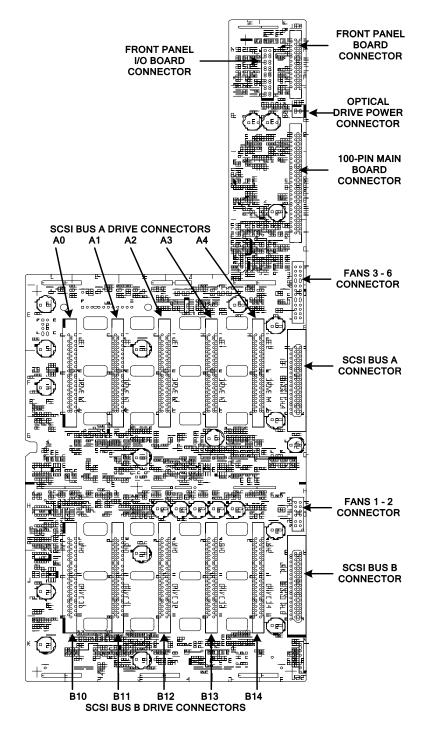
SCSI Backplane Board Component Placement (Primary Side)
